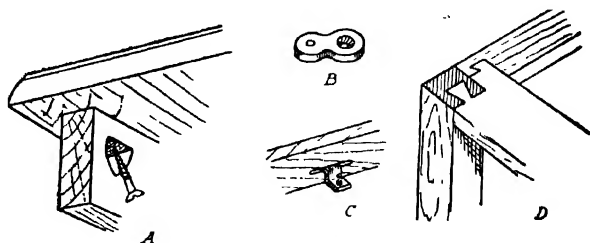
Table top fasteners: A, Pocket screwing. B, Mortise fastener. C, Sliding lug. D, Rail dovetailed into post and rail.
